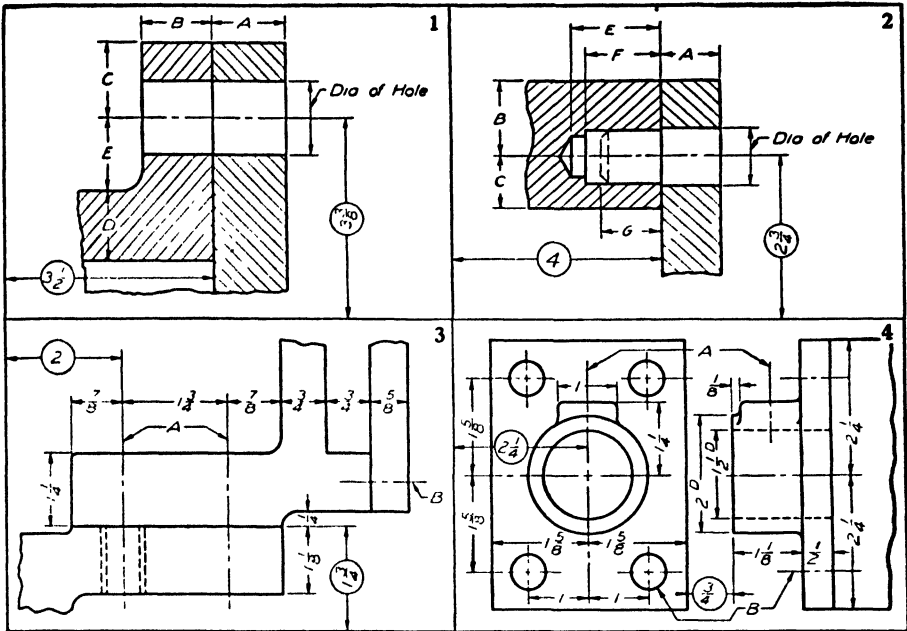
Threaded fastenings. Probs. 225 to 234.
